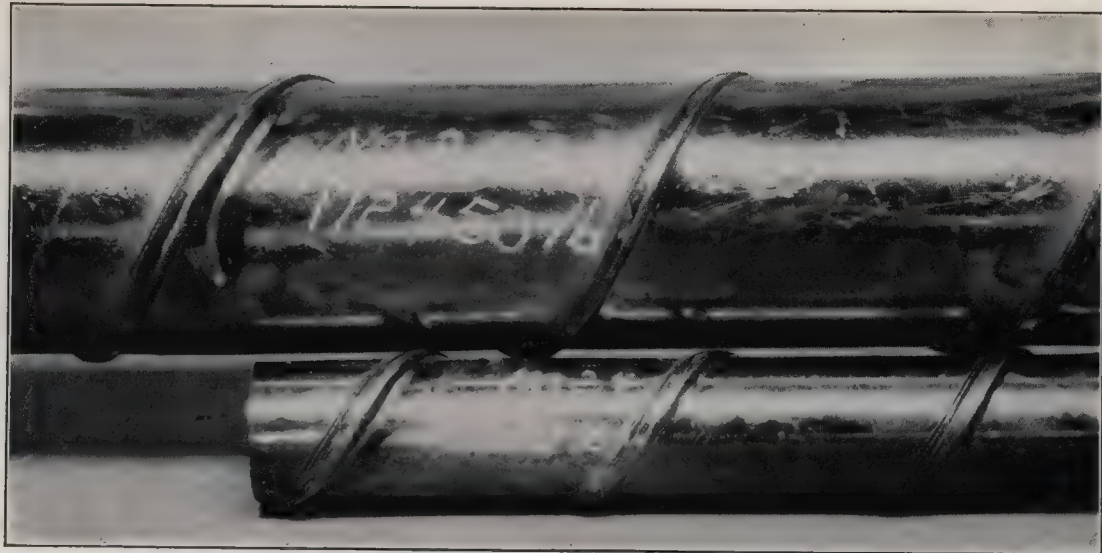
6-inch and 12-inch specimens after being subjected to longitudinal compression test.
